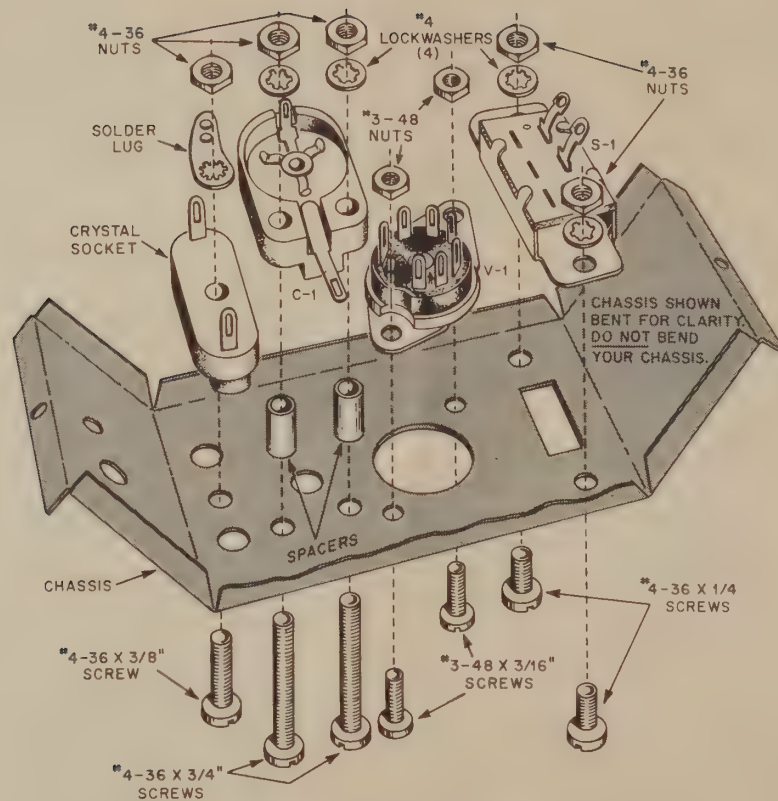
MOUNTING PARTS IN THE CHASSIS
